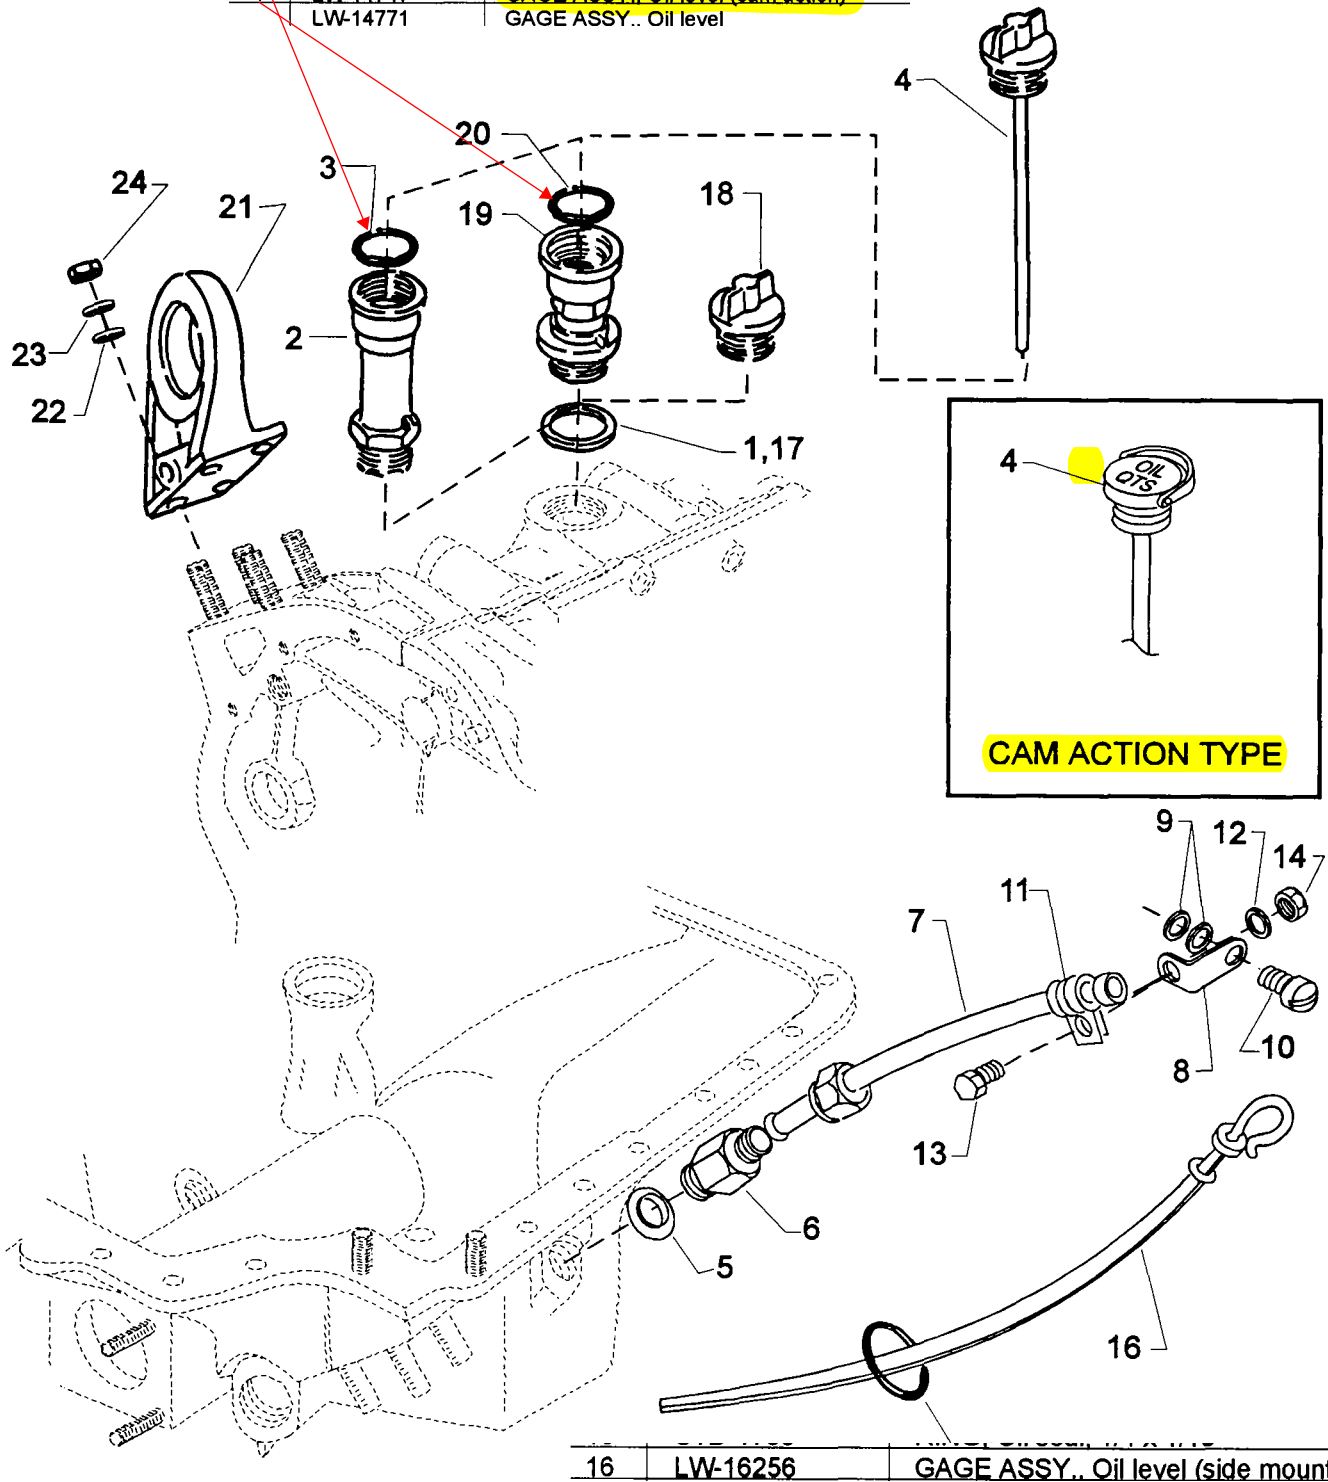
OIL LEVEL GAGE AND ENGINE MOUNTING BRACKET
